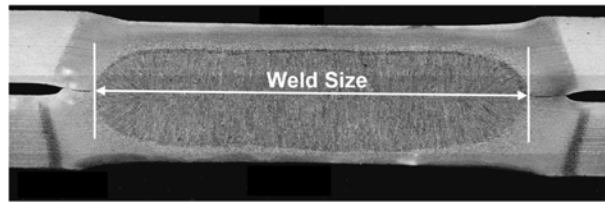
Weld size by destructive inspection of the nugget width in metallographic inspection.
